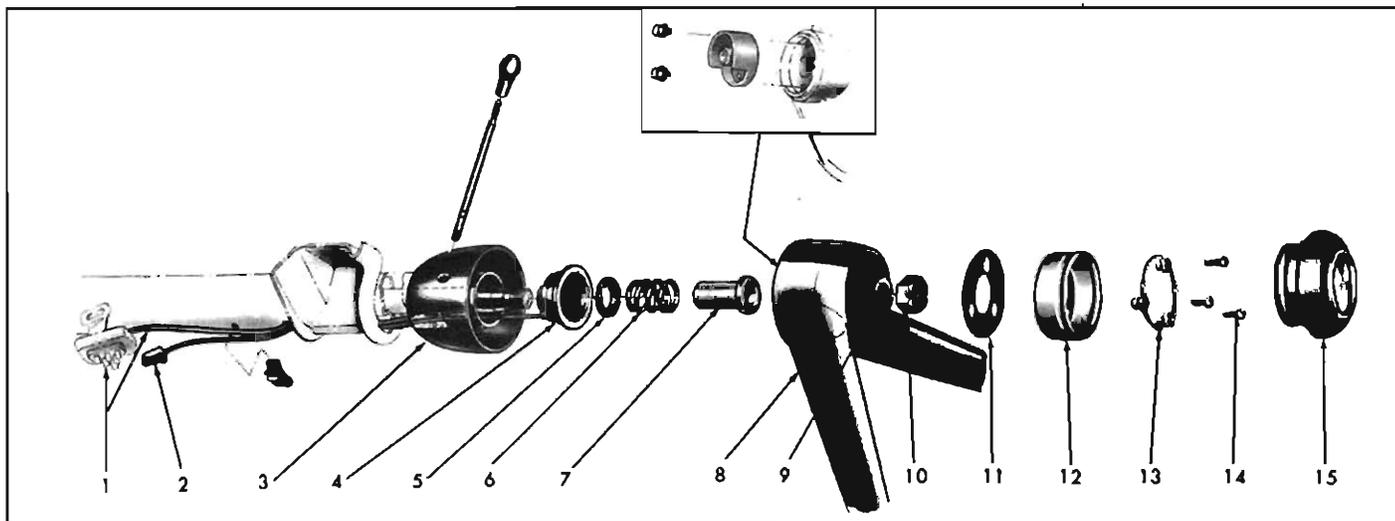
Exploded View of Upper Mast Jacket and Steering Wheel
